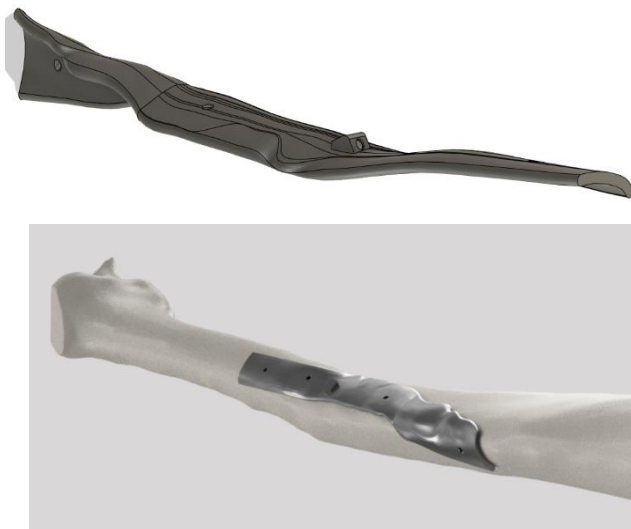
& 13. Completed CAD model of the plate and with the bone. It has 4 regular screw holes, and one fracture site screw hole. It follows the curvature of the bone precisely.
